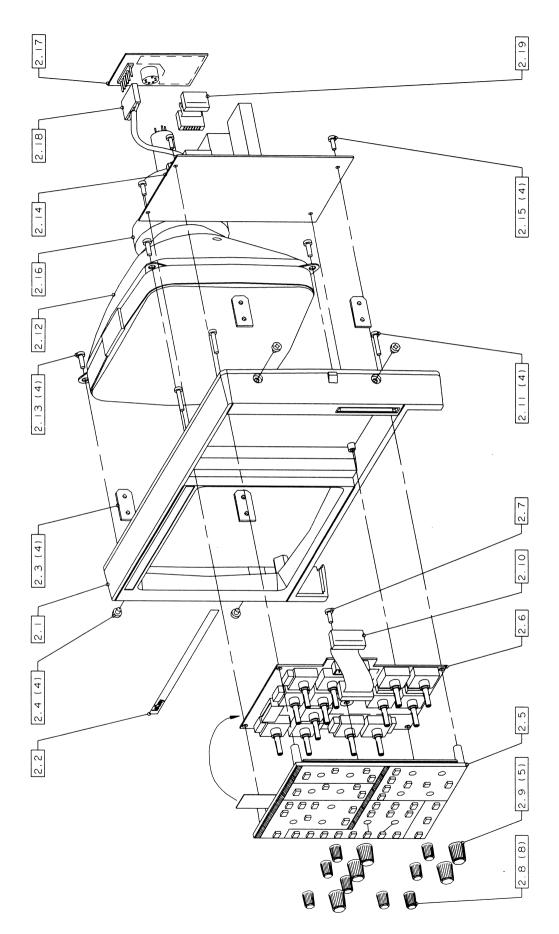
9320 LOWER COVER EXPLODED VIEW
